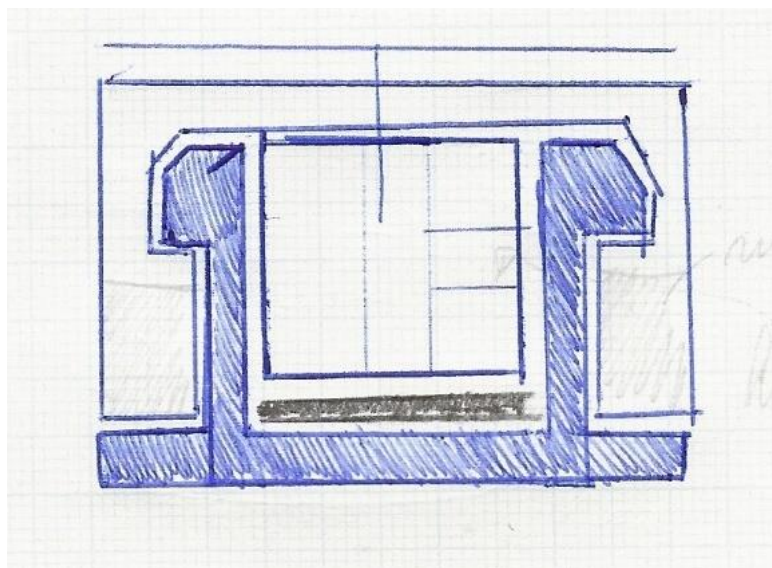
Cross-section view of snap joints for DPP (own drawing)
